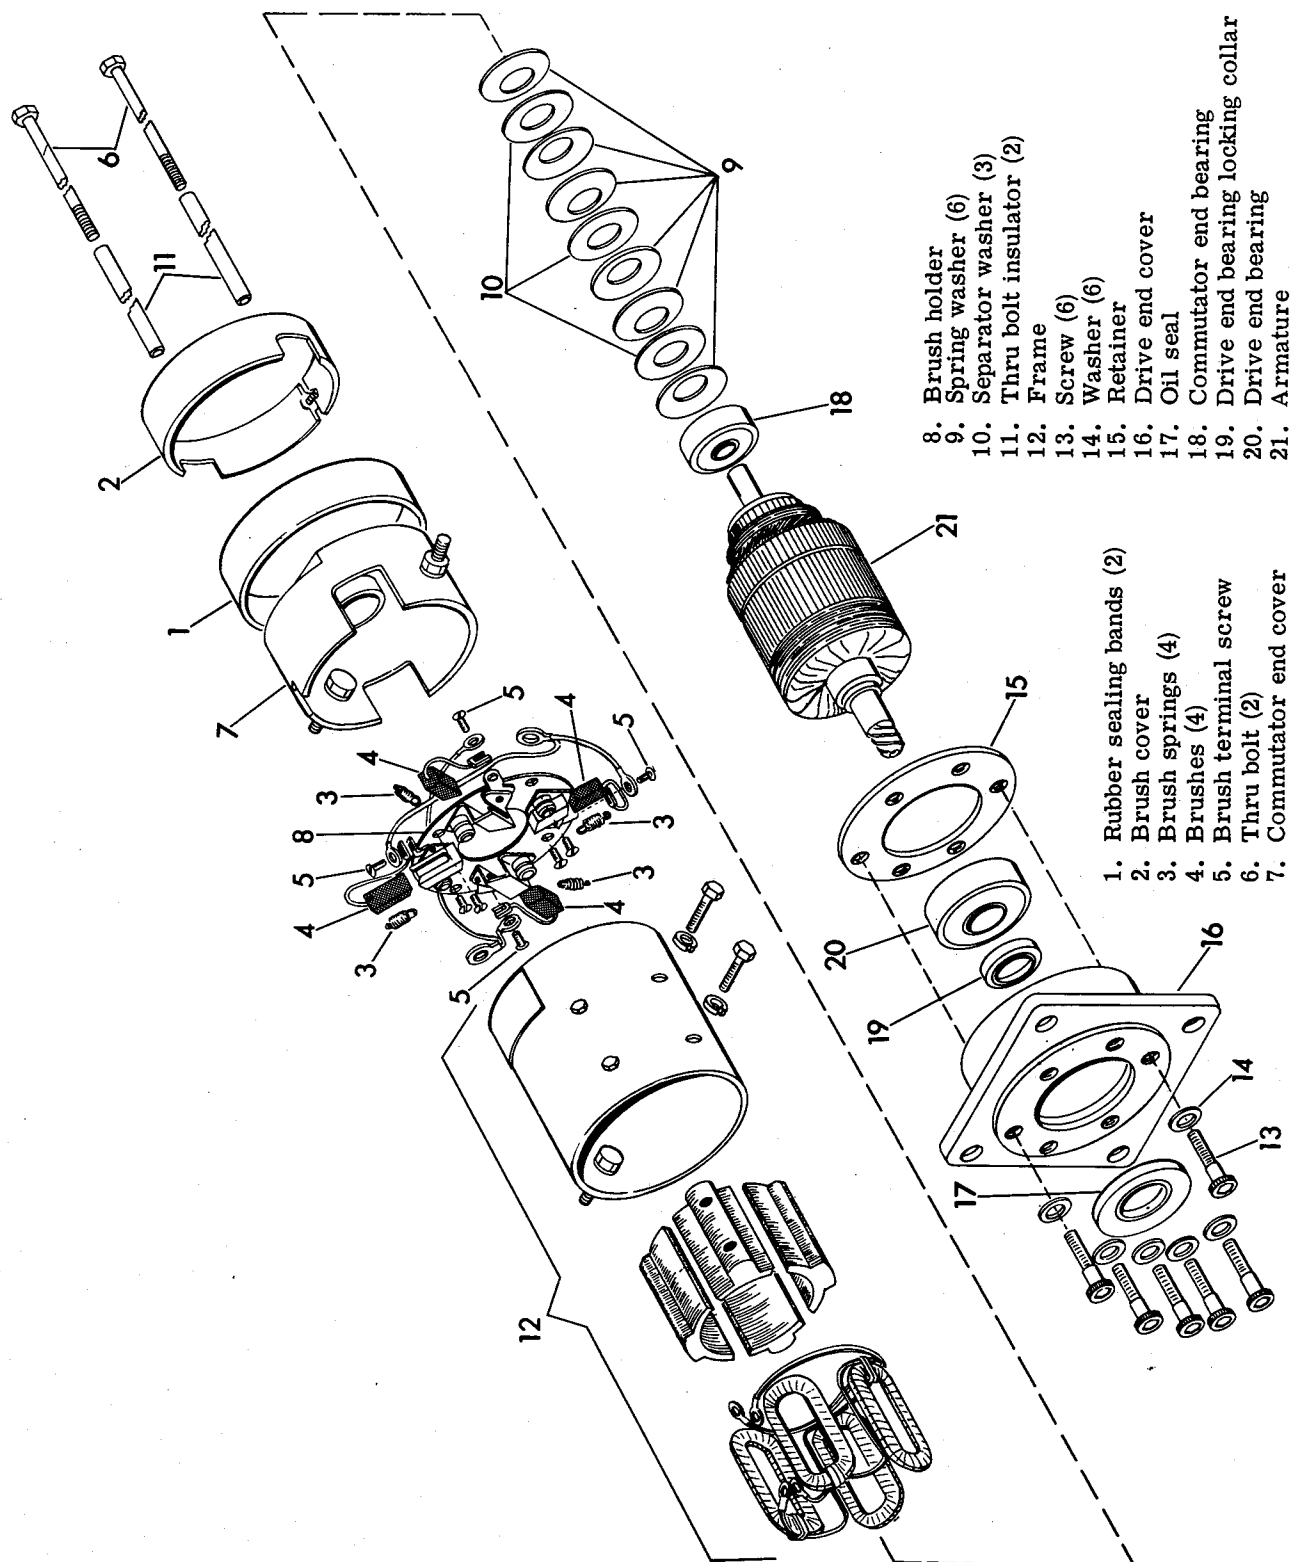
GE Traction Motor (1966 to 1971) - Exploded View
